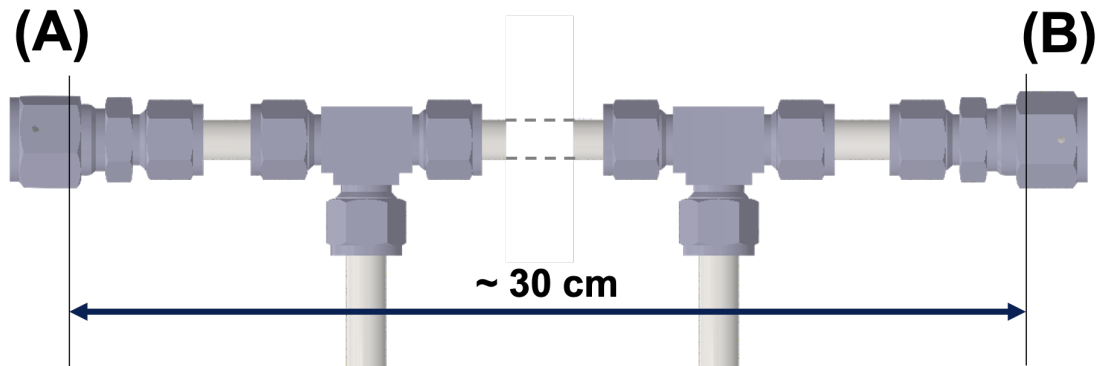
External CAD model of the ~ 30 cm prototype LAS gas cell. Parts shown are assembled with existing Swagelok components and 1/2" stainless steel piping (the input/output pipes, in reality, are 1/4", just not in this CAD model). Side (A) represents the lens end cap, with side (B) containing the sapphire window. Internal views of the two end caps are provided in Figure 6.10. CAD model credit: Y. Ko.
